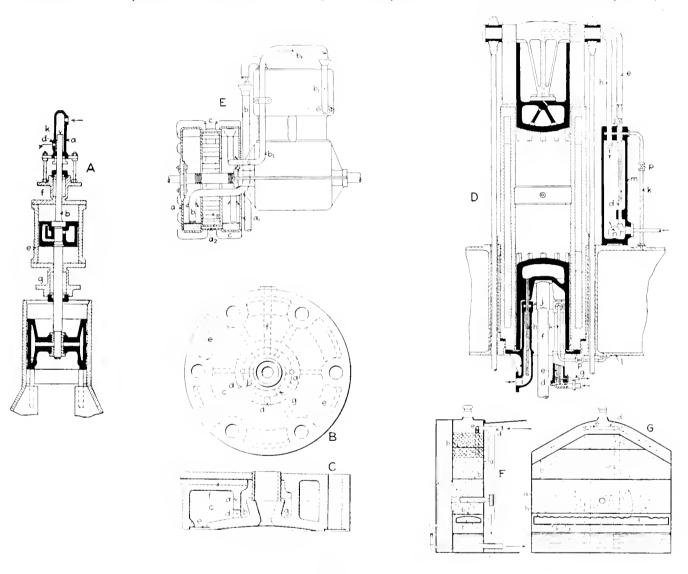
Cooling Devices for Use on Internal Combustion Engines
